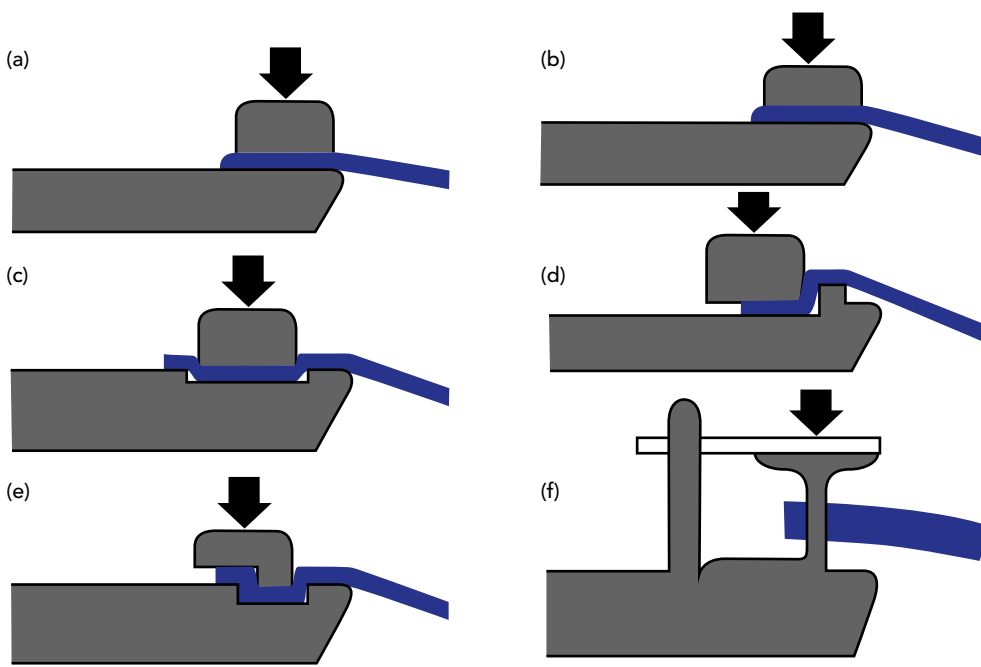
illustrates typical clamping designs to hold the hot sheet under the blowing ring using toggle clamps.
